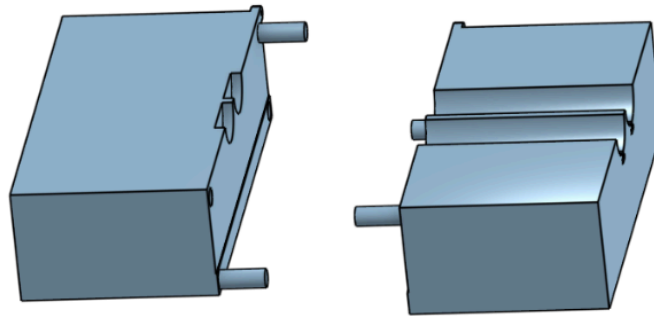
Paper Cutter Design Base Assembly [Gianna Inga]
